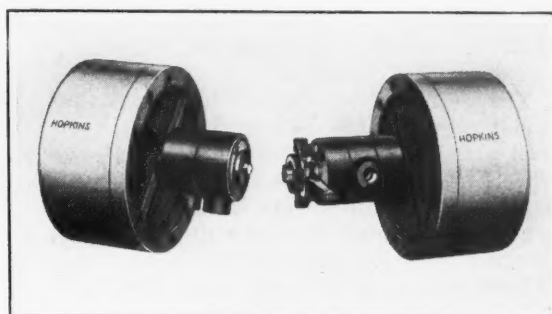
Cylinders for the Hydraulic Chucks Shown in Fig. 1
